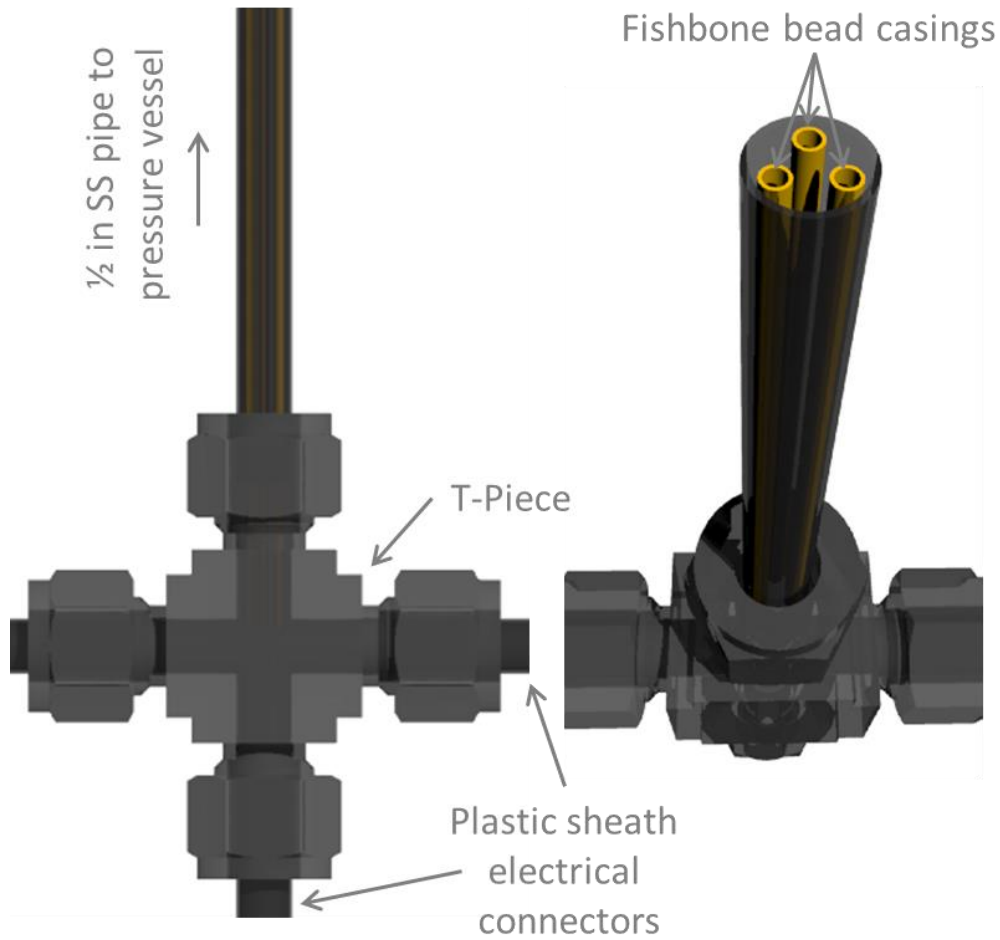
Electrical T-piece connection schematic detailing internal wiring channels developed from fish bone beads
